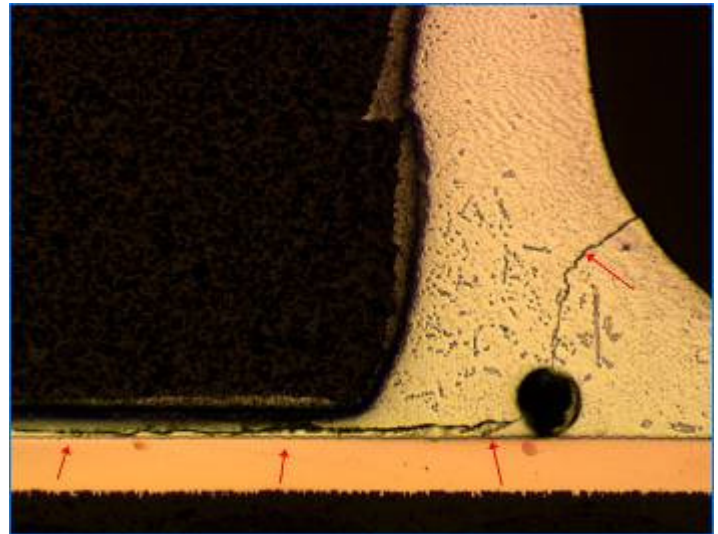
cross section, SN67, U52, right lead solder crack, 100x
